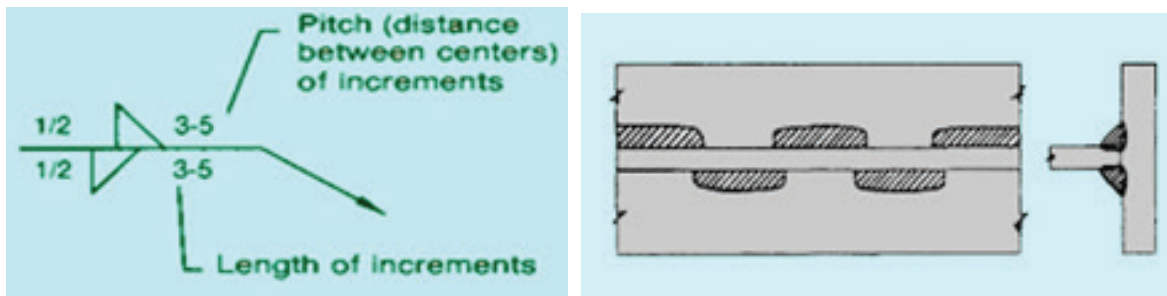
6: Welding symbols that indicate a series of separate welds
